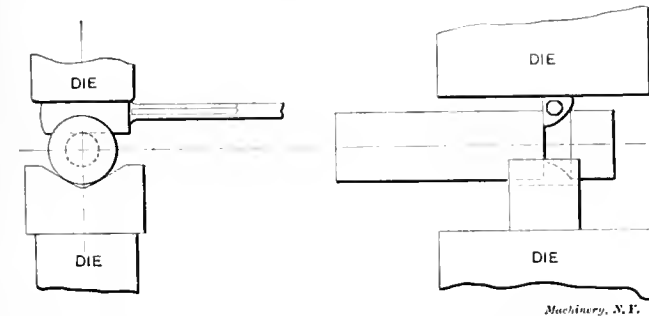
Use of Breaking Down Tool and V-block in the Steam Hammer.
